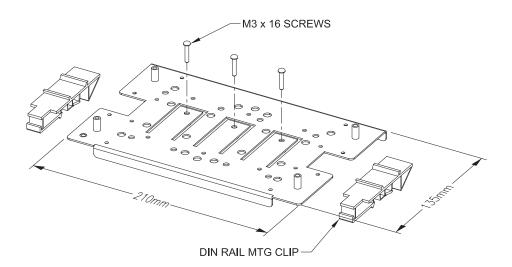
(FP1011) DIN Rail Mounting Plate – Basic Assembly
